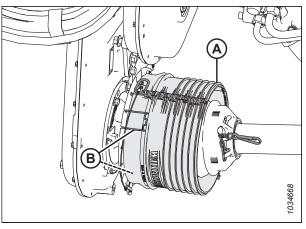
Driveline with Shield Installed on Float Module Gearbox
